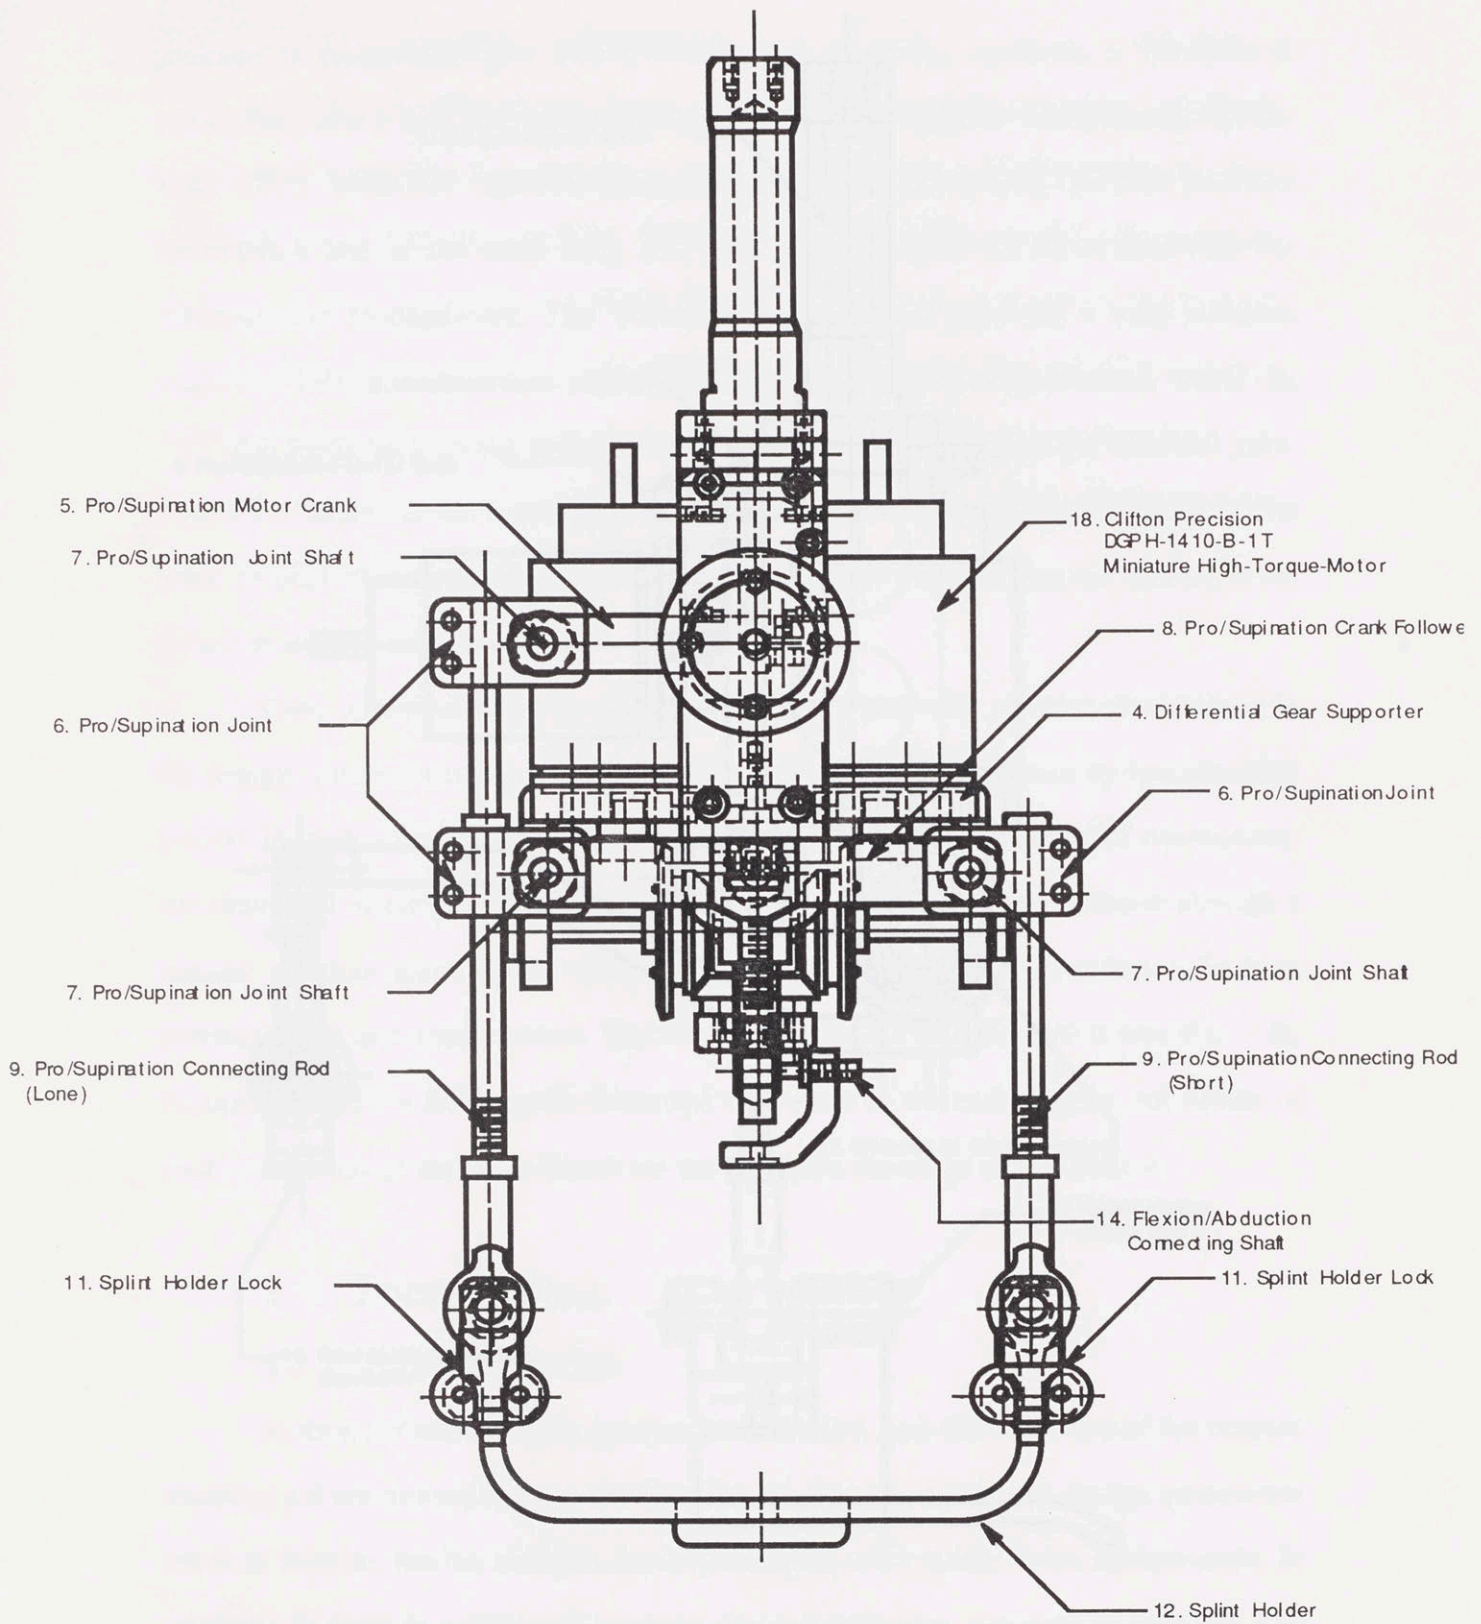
Front View of the End-Effector (scale 1: 1.8, drawing ASB E01)
